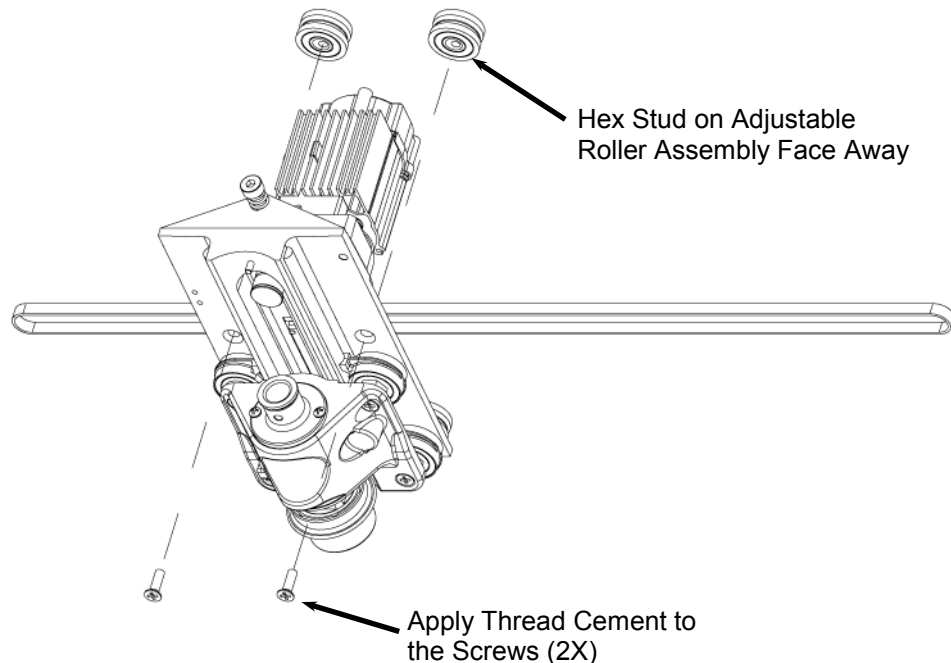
VIEW OF AN UNASSEMBLED Y-TRUCK
